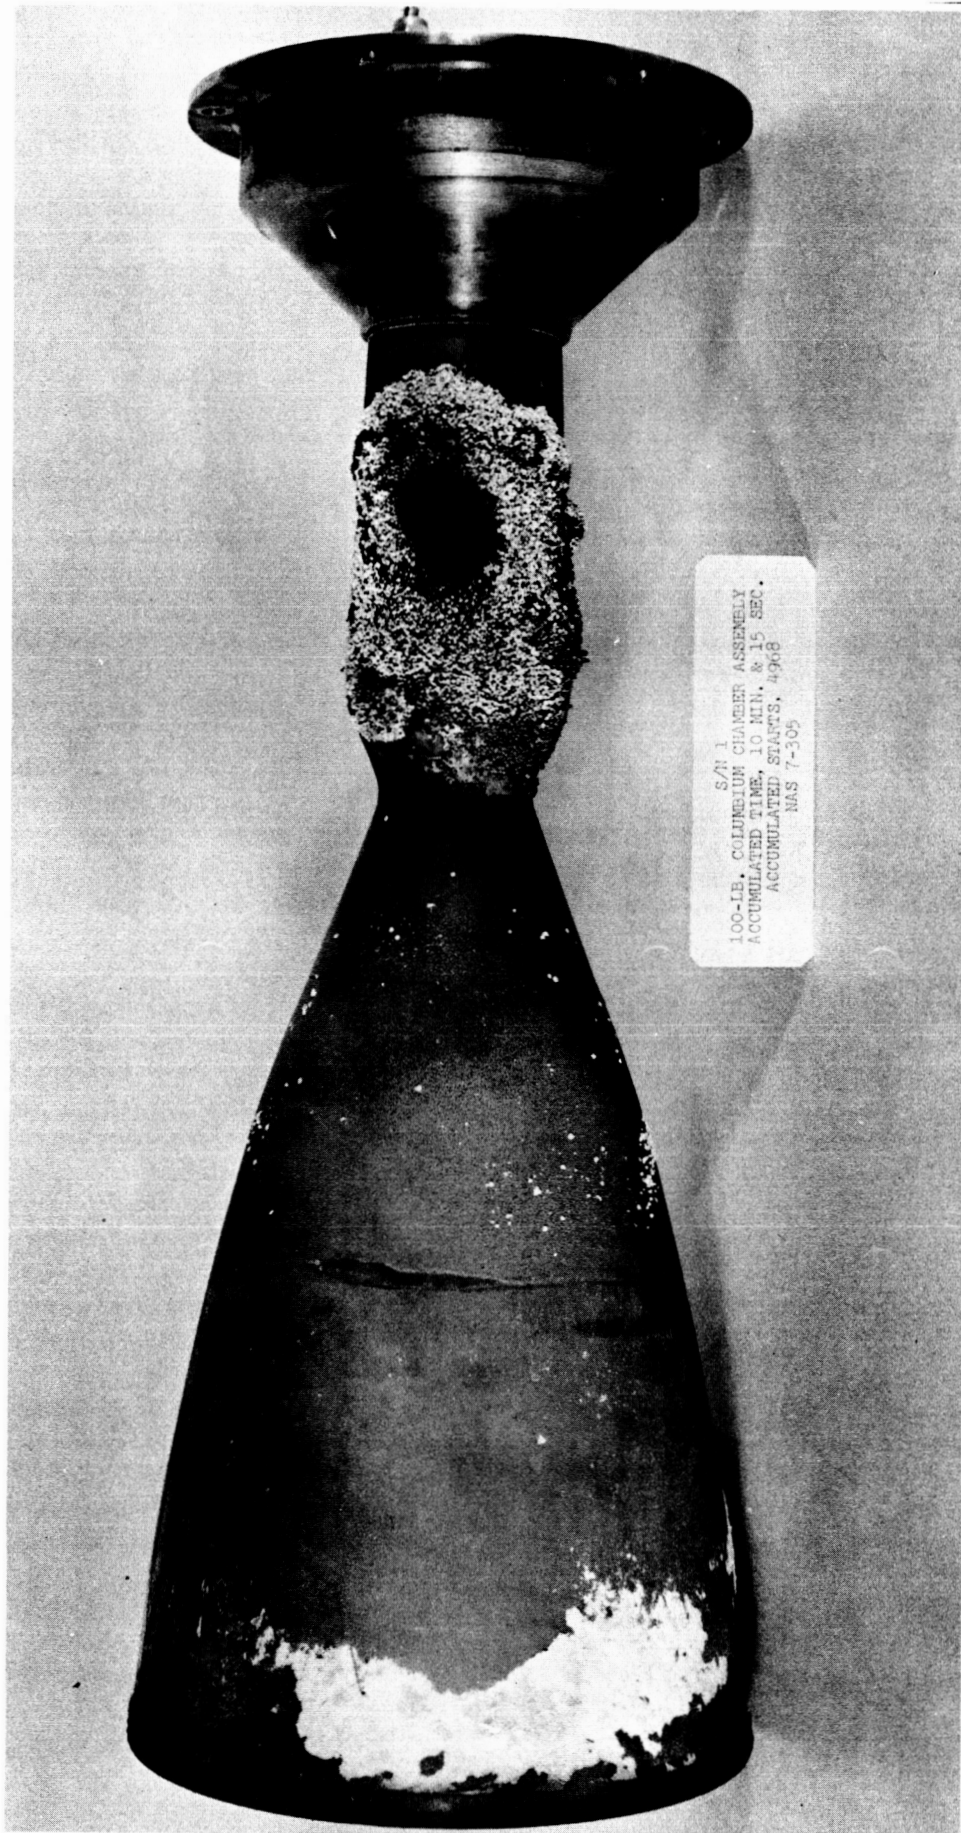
Chamber Assembly From Engine S/N 1 After Test Burnout Region
